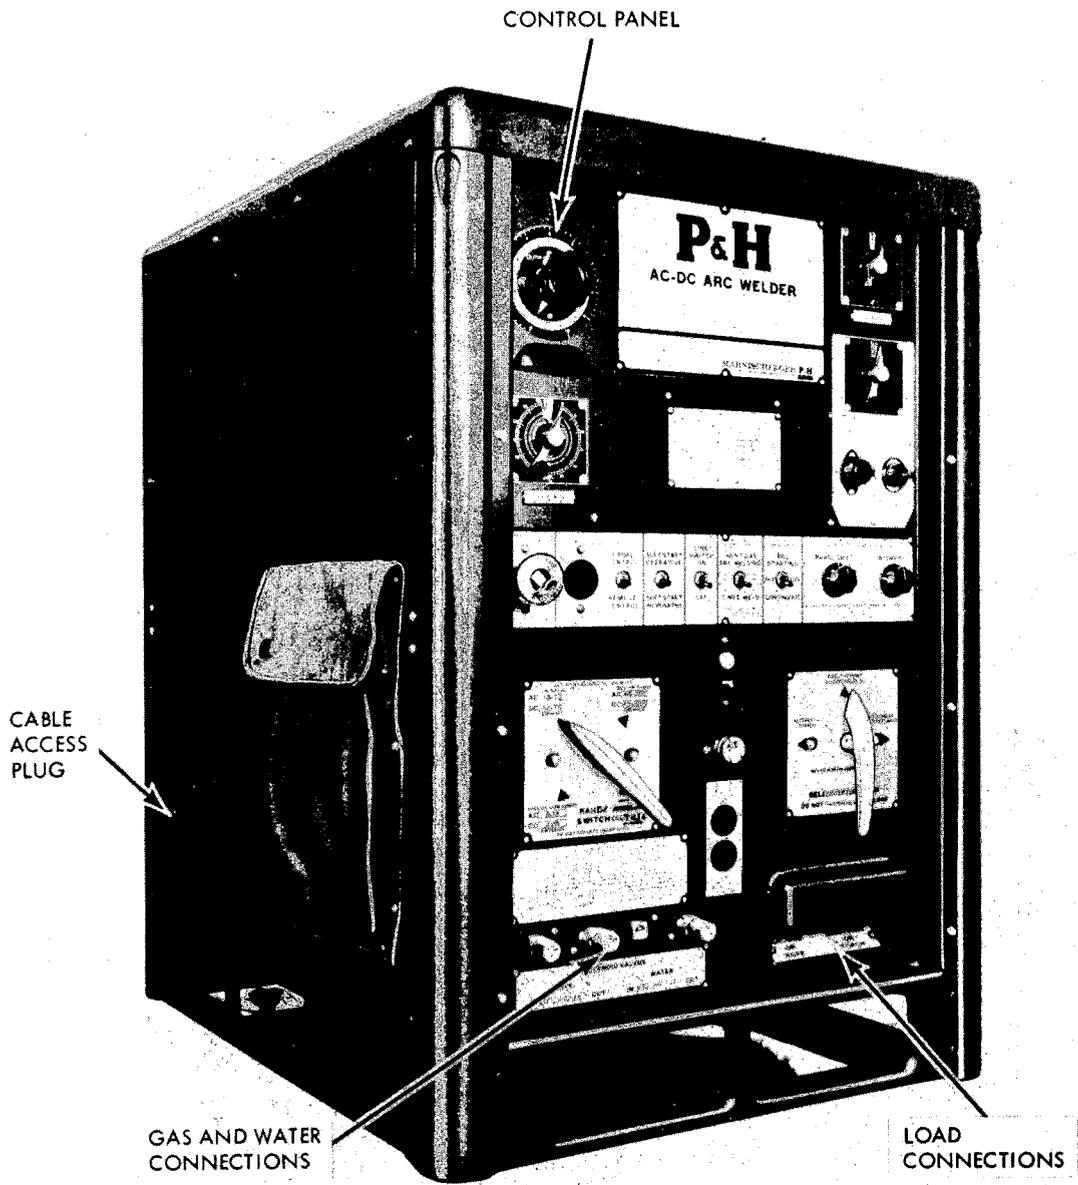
Arc welding machine right-front, three-quarter view with shipping dimensions, Model DAR-300HFSG.
